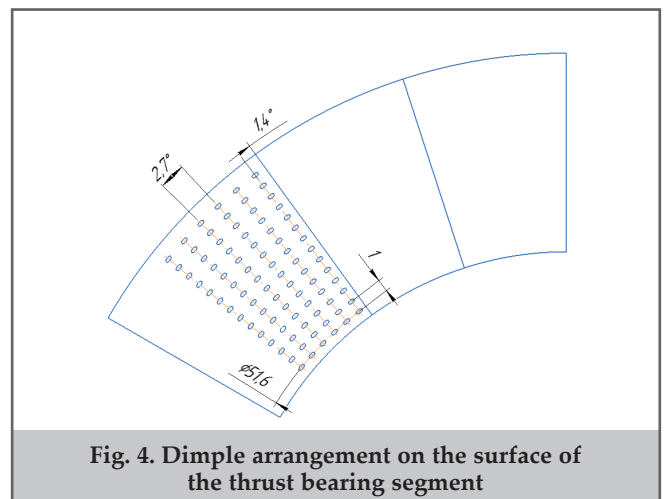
Dimple arrangement on the surface of the thrust bearing segment
